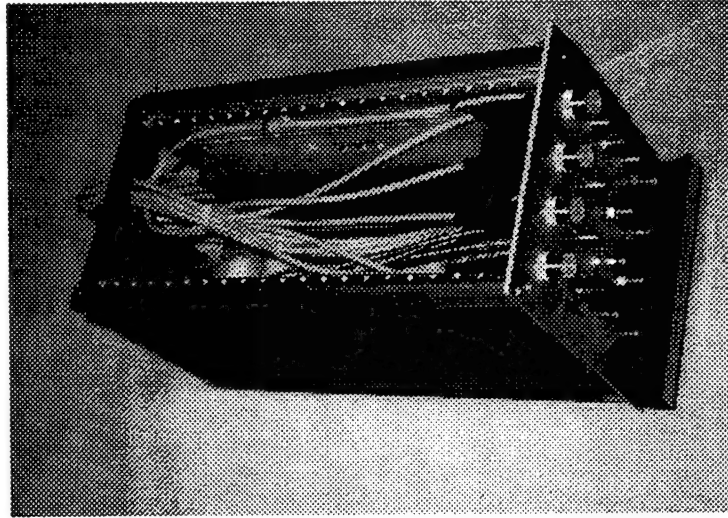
Photograph of splitter / beamformer card assembly.
